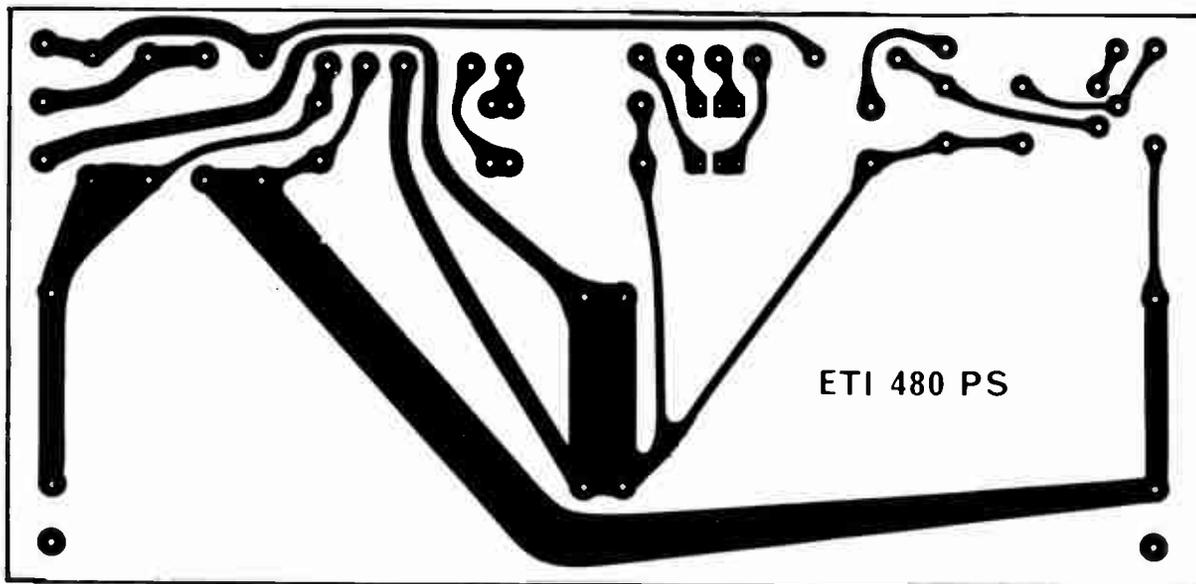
Printed circuit layout of the power supply. Full size 160mm x 76mm.
